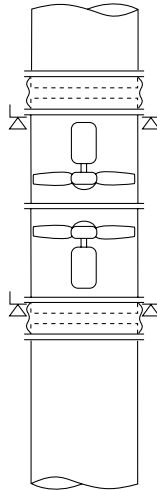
V. For a two stage fan support at the upper and lower flanges.
